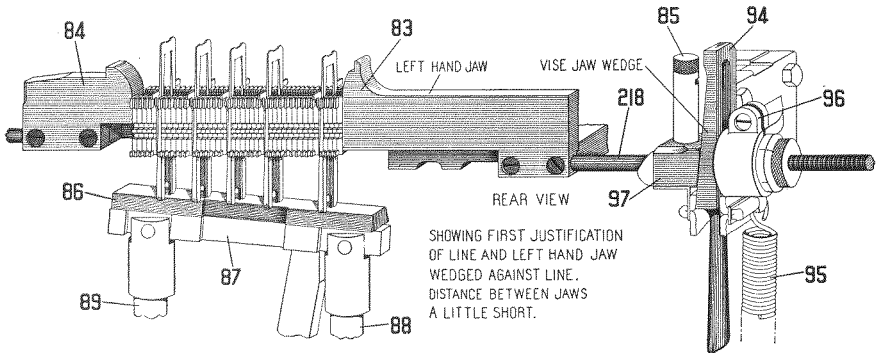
First justification of the line. The wedge 94 has gone up to its highest position and the left-hand jaw 83 is forced in, making the line the proper length. The spacebands are driven up by the inclined block 86, being driven up an unequal distance. This view is from the rear of the machine with all the parts left out.
